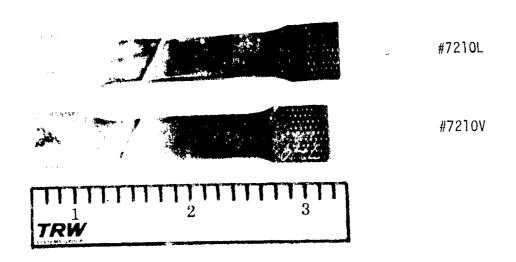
Tensile Tested 2219-T87 Aluminum Specimens Showing Type of Fracture (1X)
